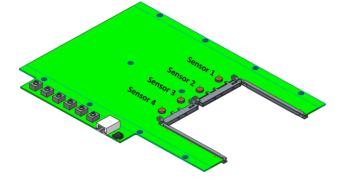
LFF Card Thermal Test Fixture Design – Cover Removed
